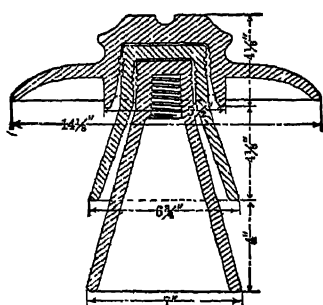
SECTION OF HIGH-TENSION INSULATOR.
